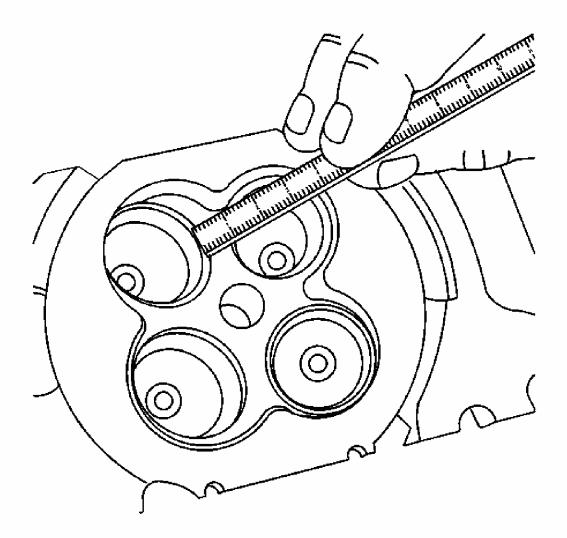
Checking Valve Seat Width Courtesy of GENERAL MOTORS CORP.
